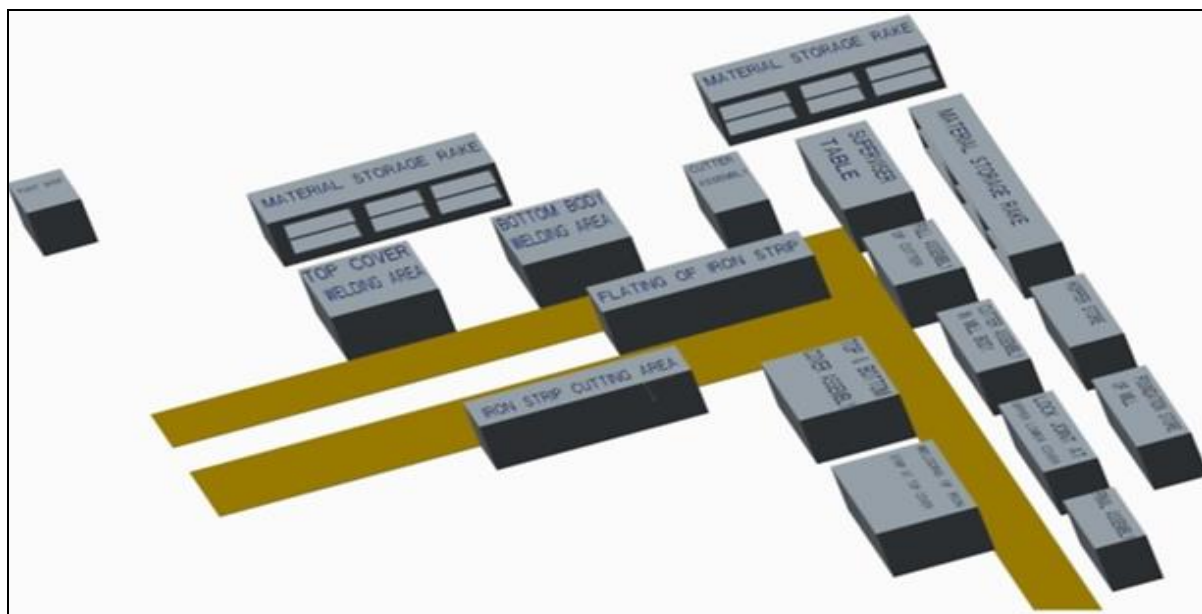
Current Maize Grinding Mill Assembly Line Plant Layout.
